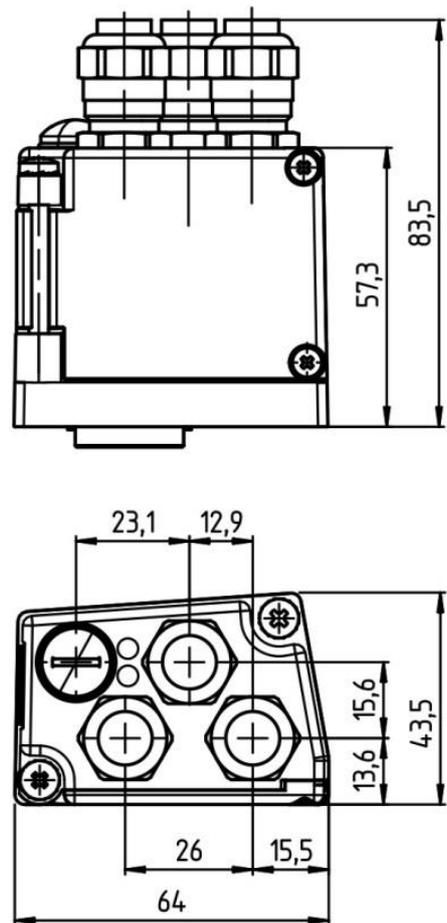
Dimension drawing BE 901 MK SSI connection hood (all dimensions in mm)
